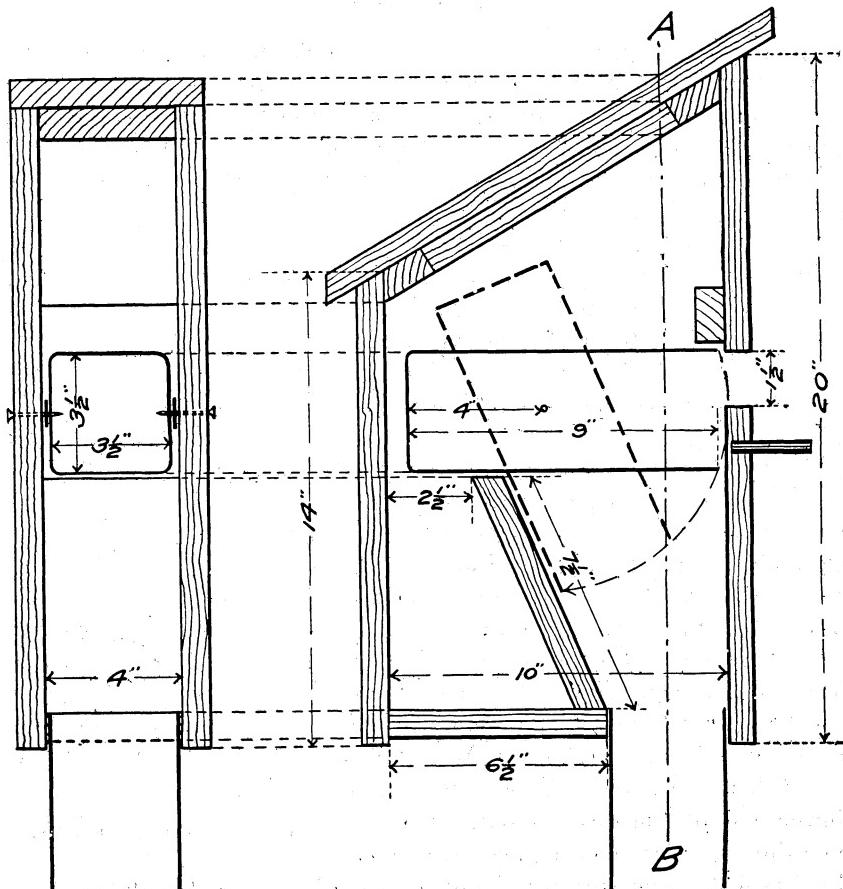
Sections showing construction of Tesch nest-box trap.
